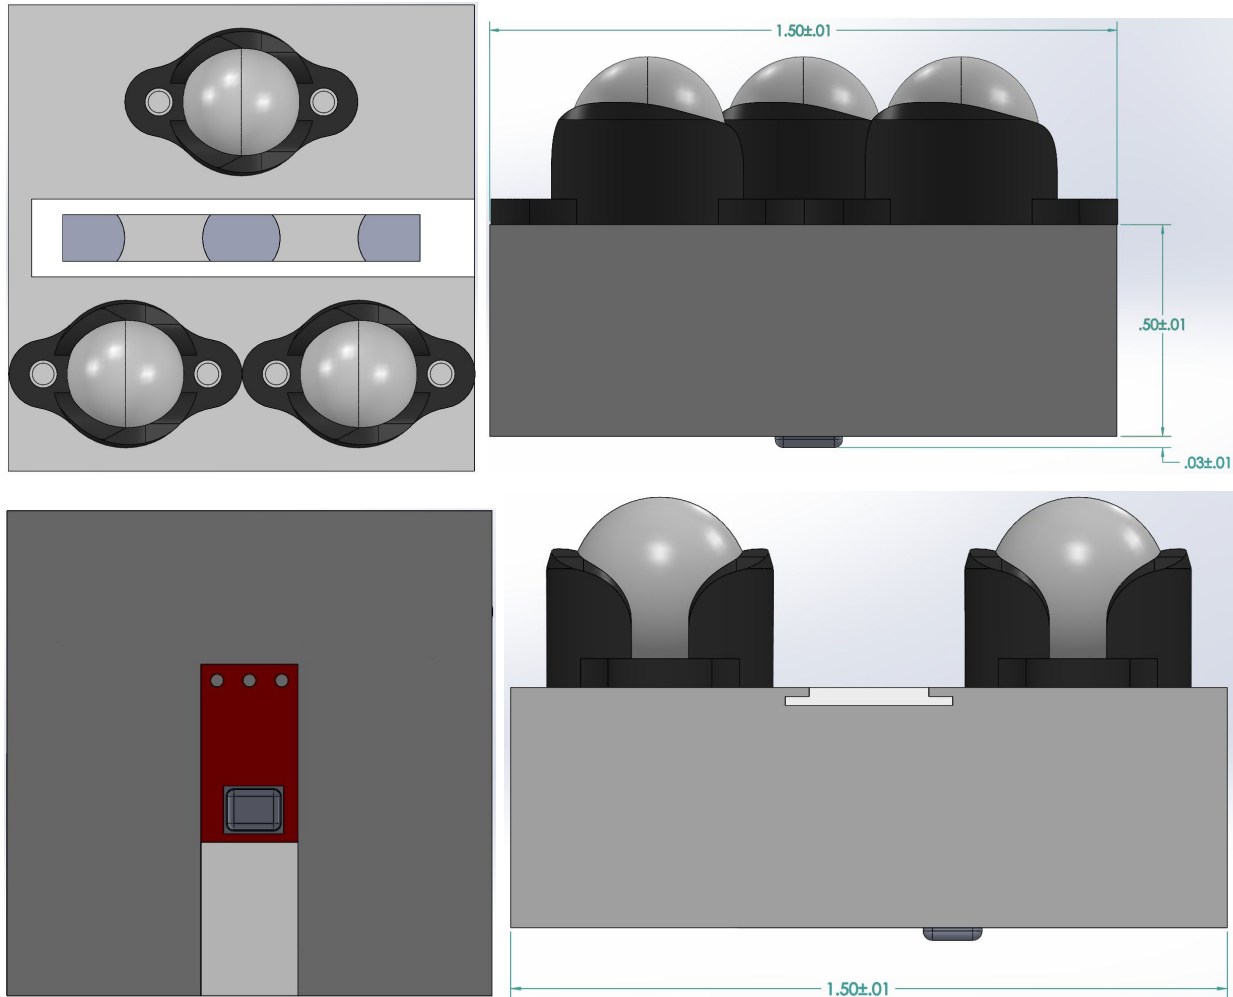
The Solidworks model of the final design, complete with dimension. The views from left to right, top to bottom are the top, front, bottom, and right side.
